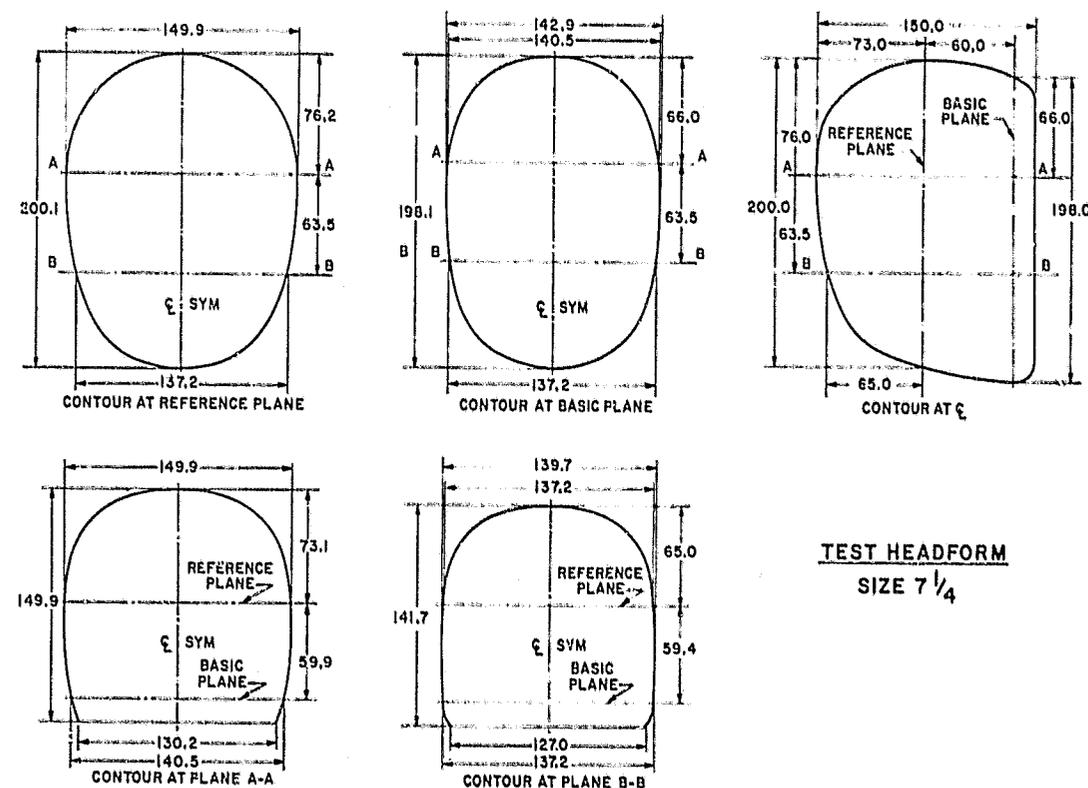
Test Headform. Dimensions are in millimeters.
